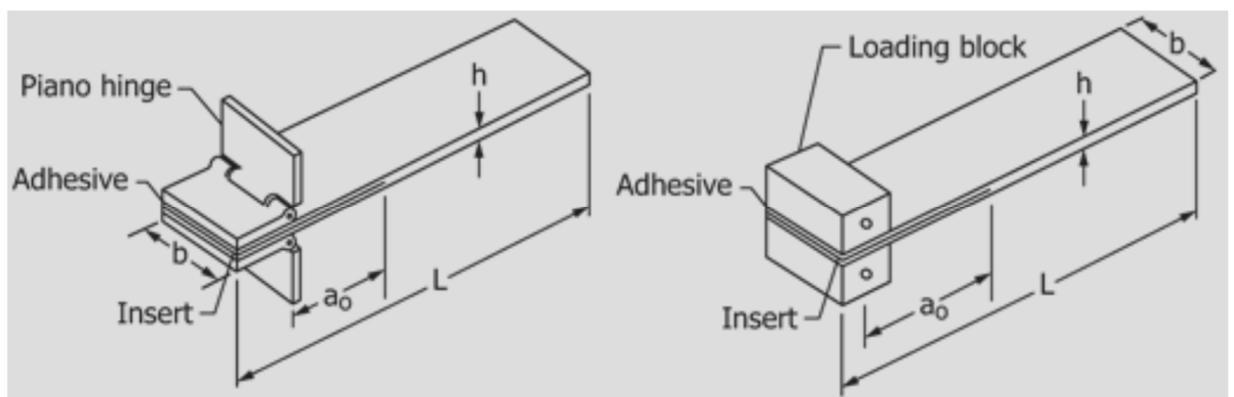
DCB test specimen bonded with piano hinges and loading blocks [23]
